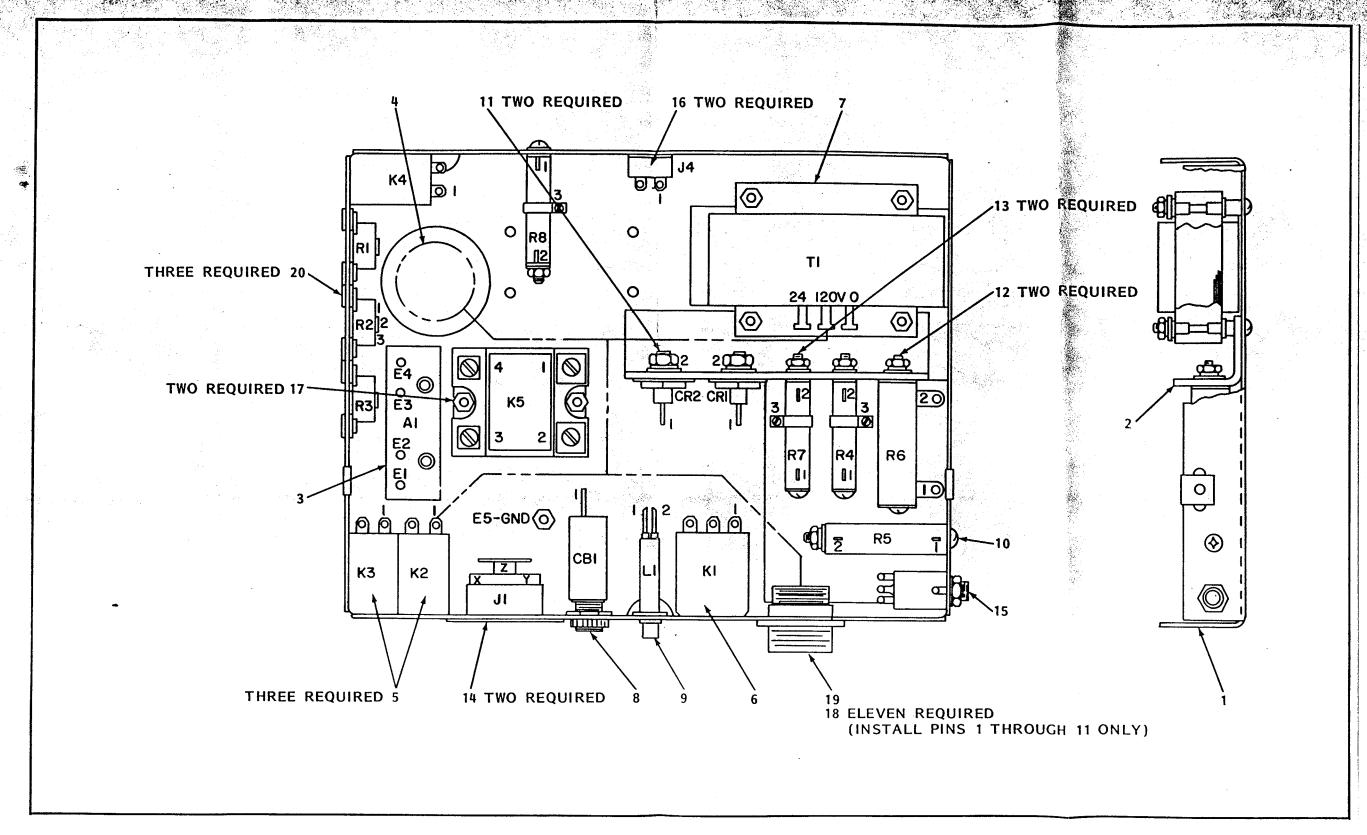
X-Ray Generator Chassis Assembly (P/N 500147) Location of Components
